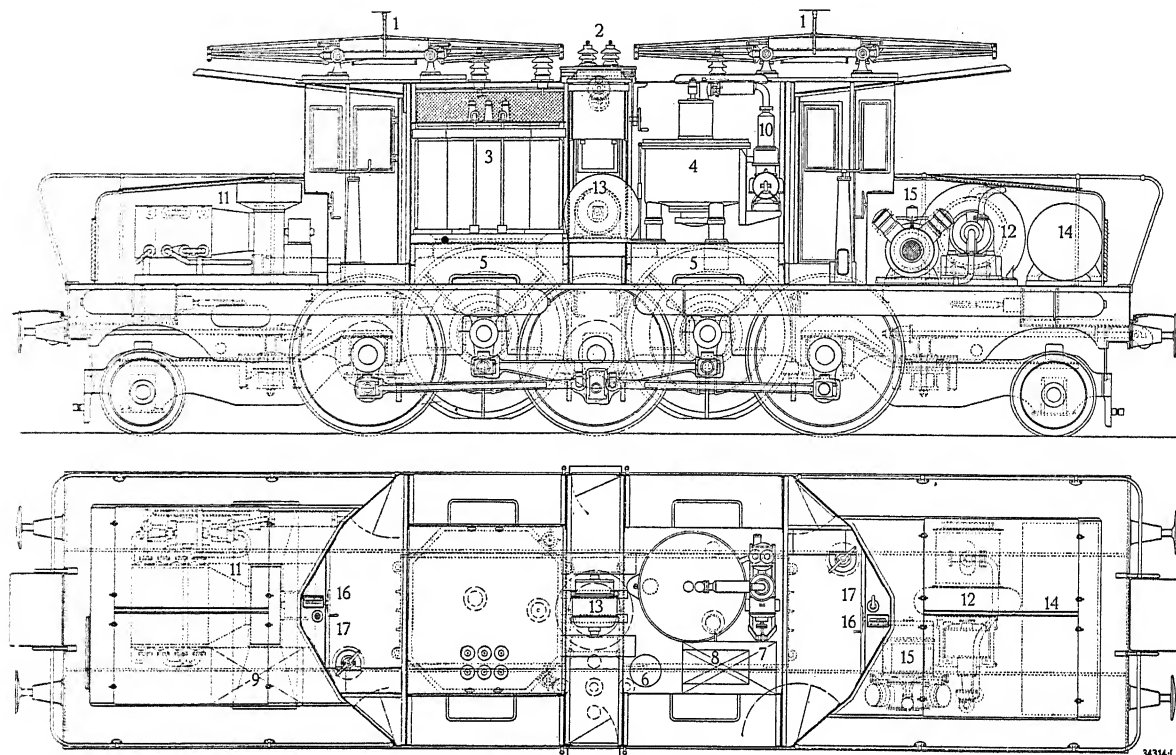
GENERAL LAYOUT OF SINGLE-PHASE TEST LOCOMOTIVE WITH RECTIFIER GRID-CONTROLLED MOTORS
